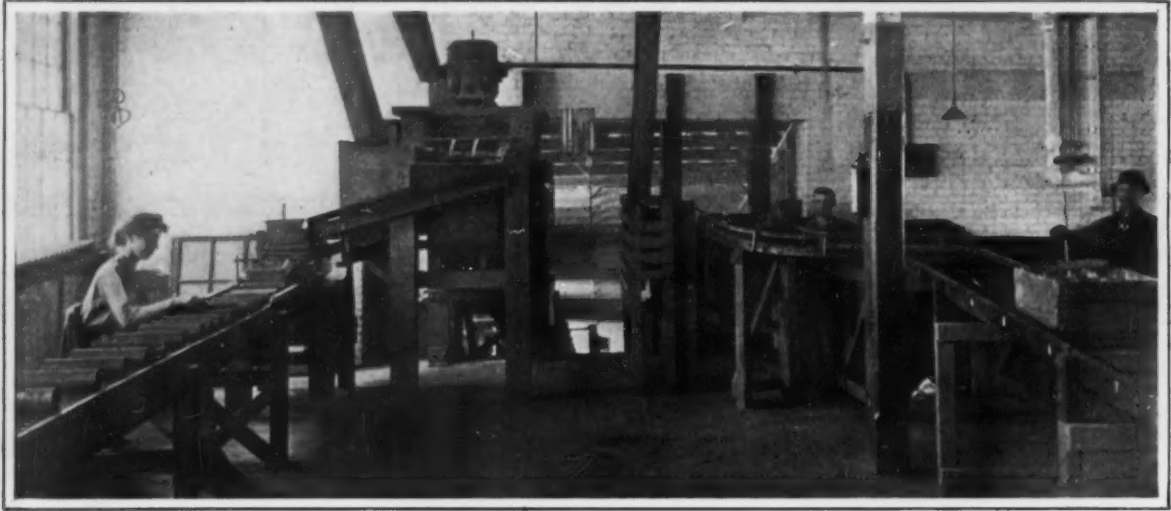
Belt Conveyors Which Carry Cleaned Parts to Second Floor, Where Assembly Began. They have independent clutch control at the heads
